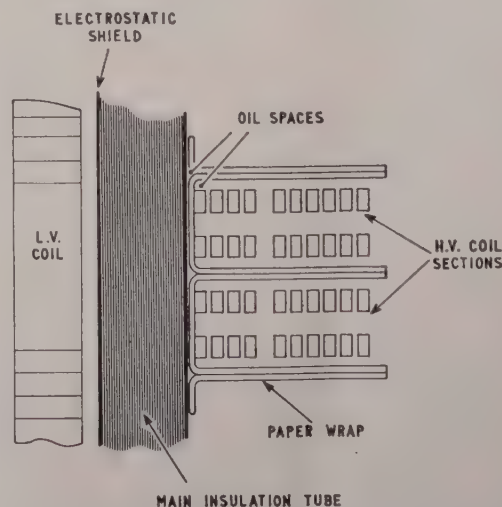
Part section of coils showing oil spaces where, if gas is present, corona could be set up
